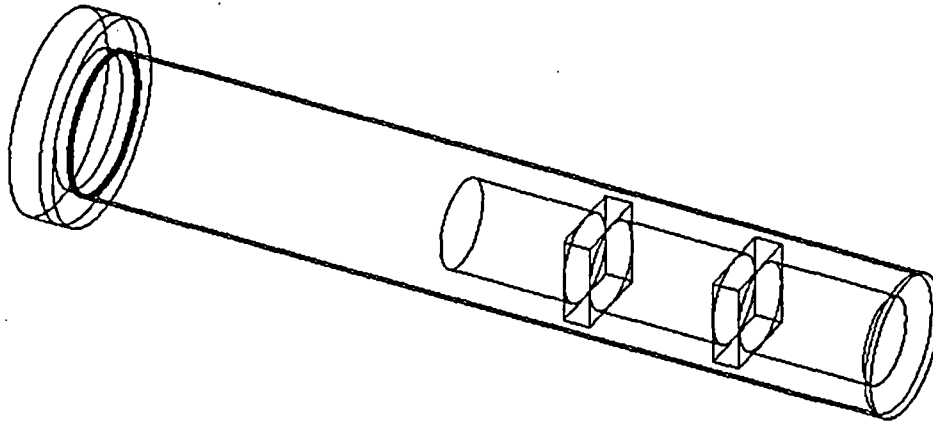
Containment vessel containing 2.29-in. square bars and 1-in. thick Cat 277-4 canned spacers.
